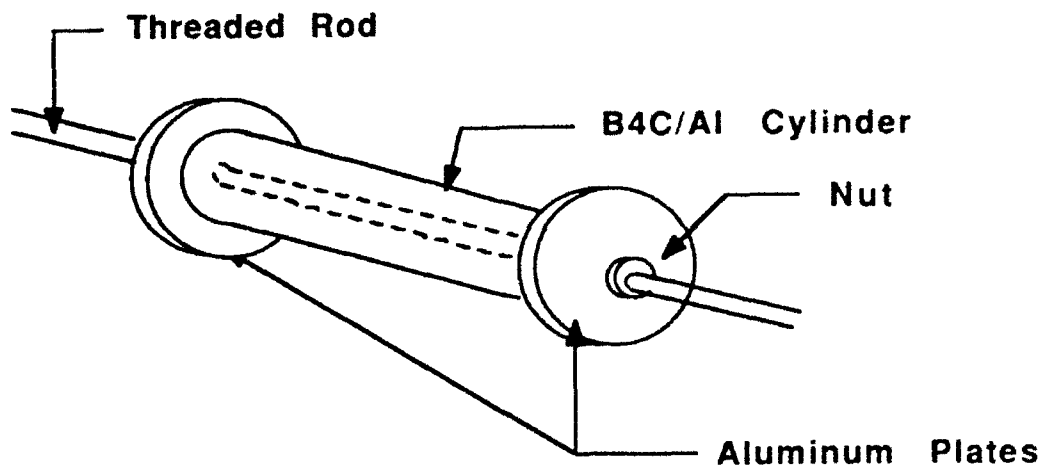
Fixture for grinding the external diameter of the cast cylinder.
